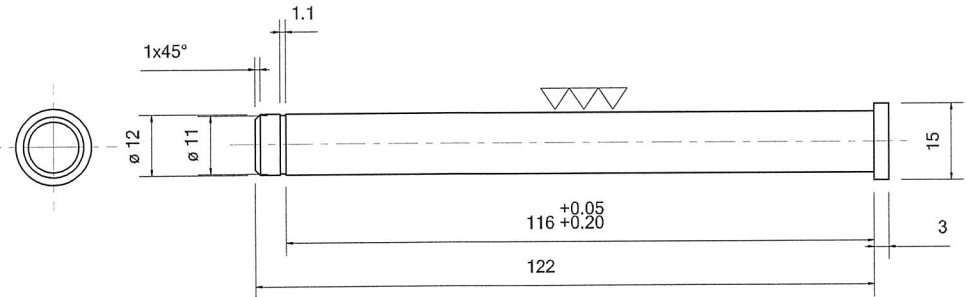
Details drawing : 2012-DWG-MCA-ACD-M-001-B-5
